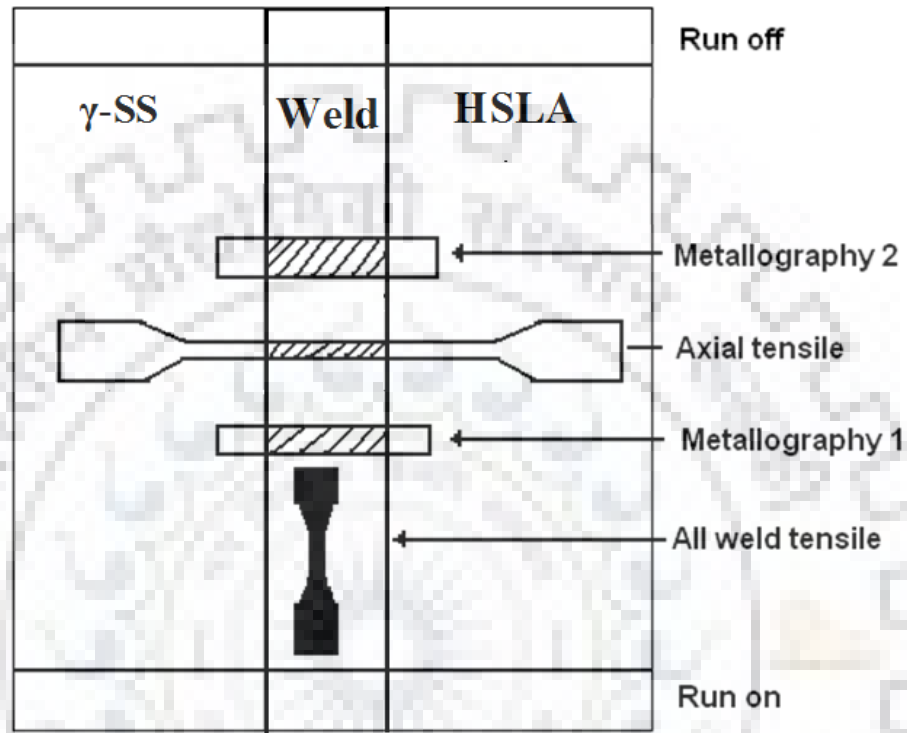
Schematic diagram of collection of test specimens from the dissimilar weld joint.
